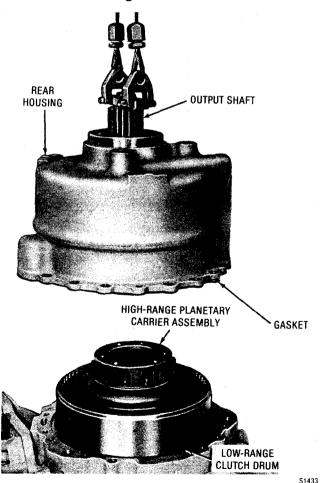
Removing rear housing and attached parts (TRT 2221-3, 2421-3 with overdrive)
